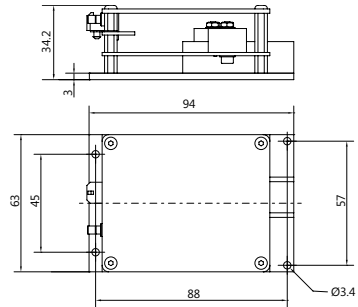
Outline drawing of DPS series drivers with conductive pad
